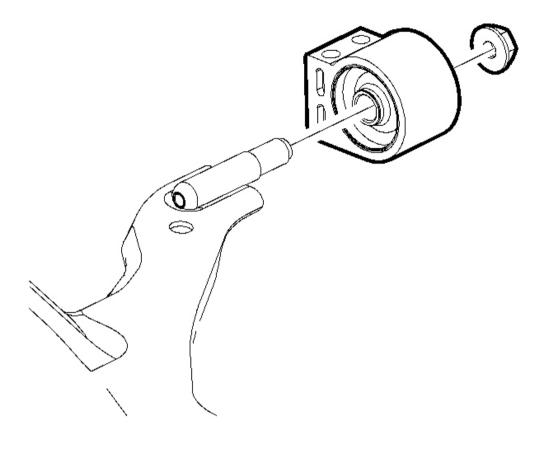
Rear Bushing & Nut Courtesy of GENERAL MOTORS CORP.
